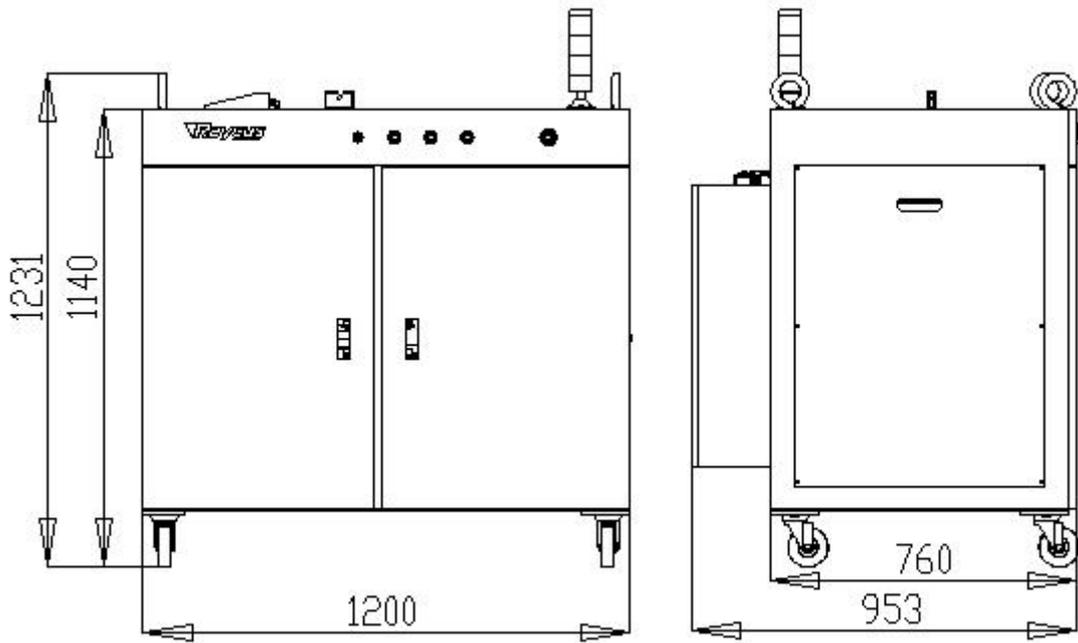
(c) Dimensions of 6000W Product (unit:mm)
